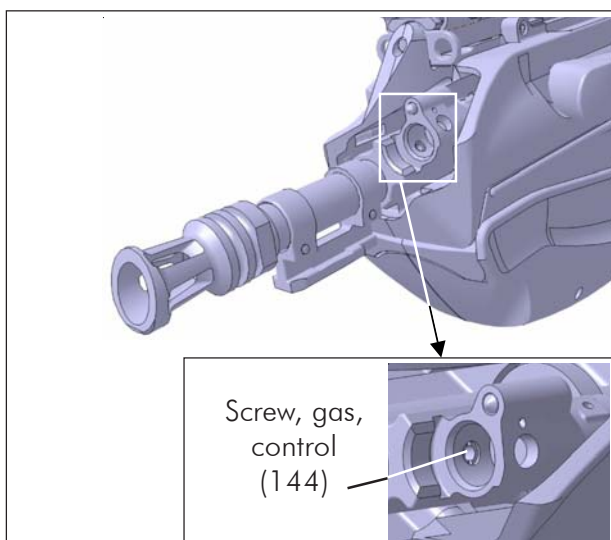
k - Checking of the screw, gas control (144) and of the housing of the plug, gas
